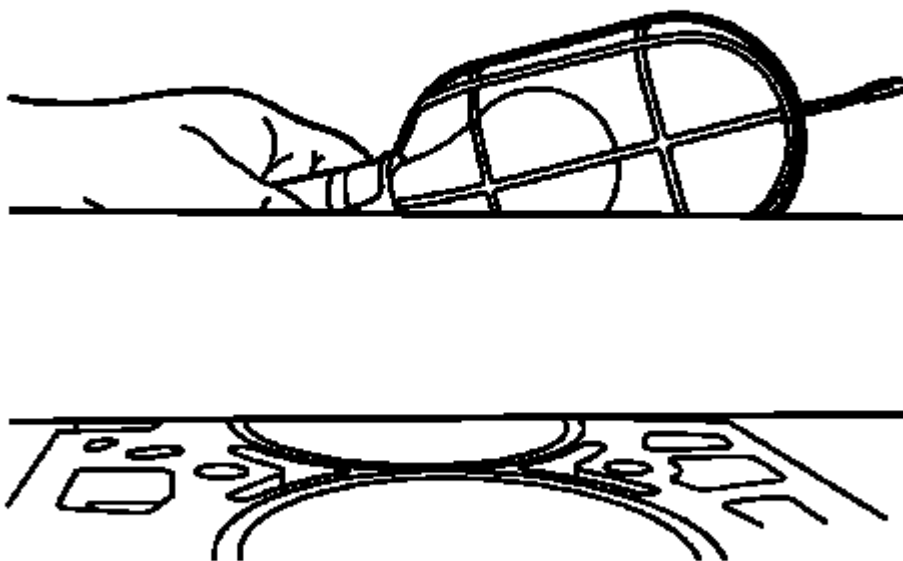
Checking Cylinder Block Deck Surface With Straight Edge
